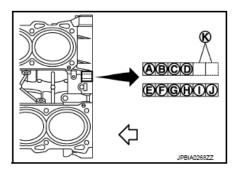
Identifying Cylinder Bore Grade On Rear Side Of Cylinder Block And Select Piston Courtesy of NISSAN NORTH AMERICA, INC.
